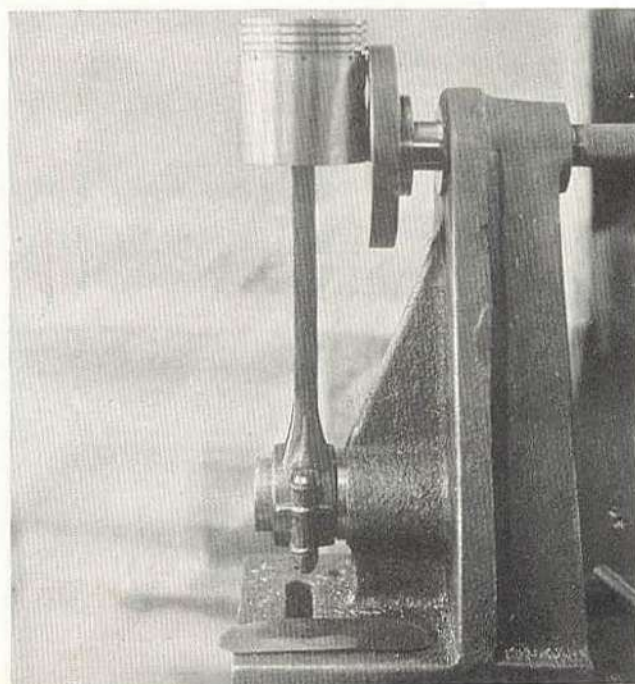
Connecting rods should be checked for alignment before reassembling.
